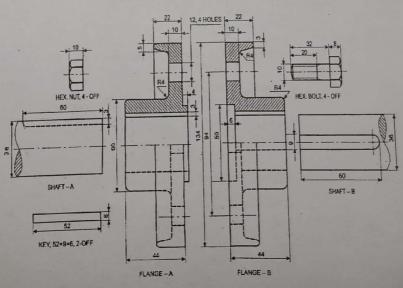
PROTECTED FLANGE COUPLING (DETAILS)
